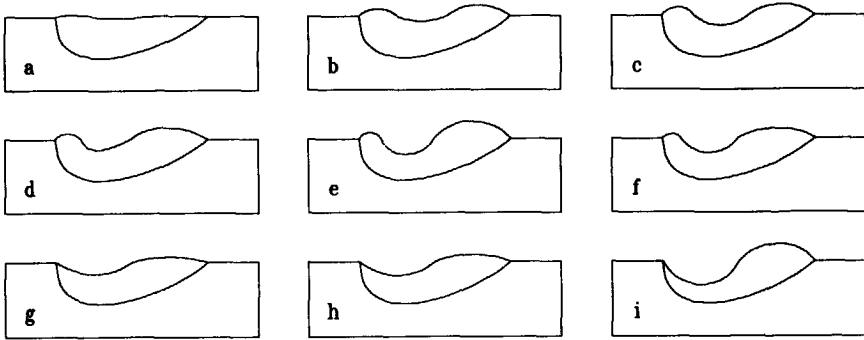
Schematic drawing of observed weld pool surface movement in the case of mode 1 oscillation (travelling arc welding) based on the analysis of film 2.
